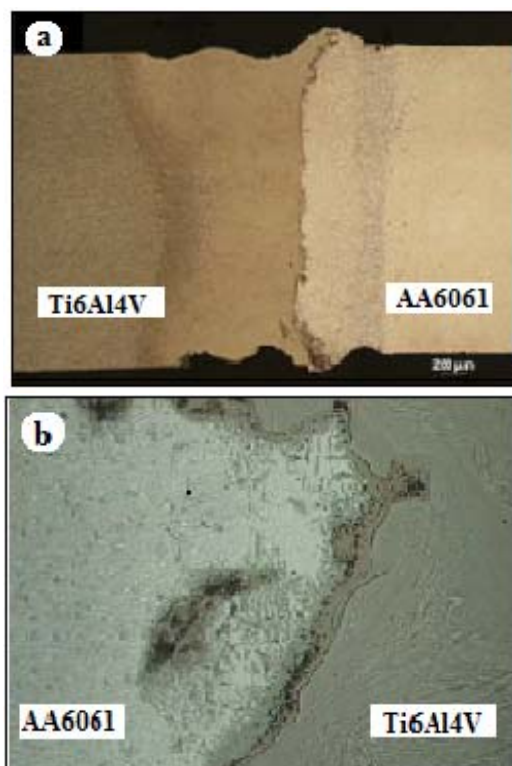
(a) Weldment cross section and (b) Magnification of the bimetallic interface
